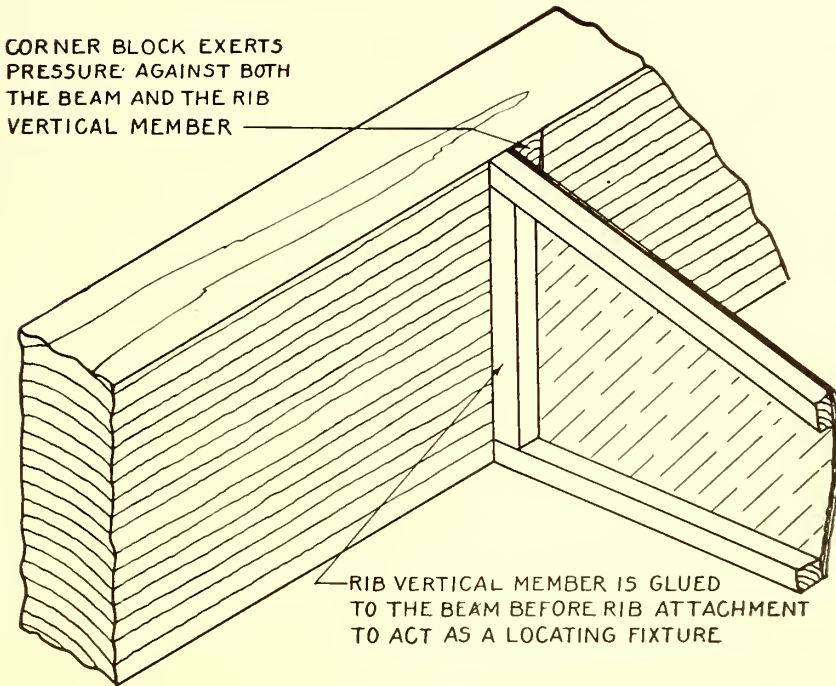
Use of Rib Vertical as Locating Fixture.
